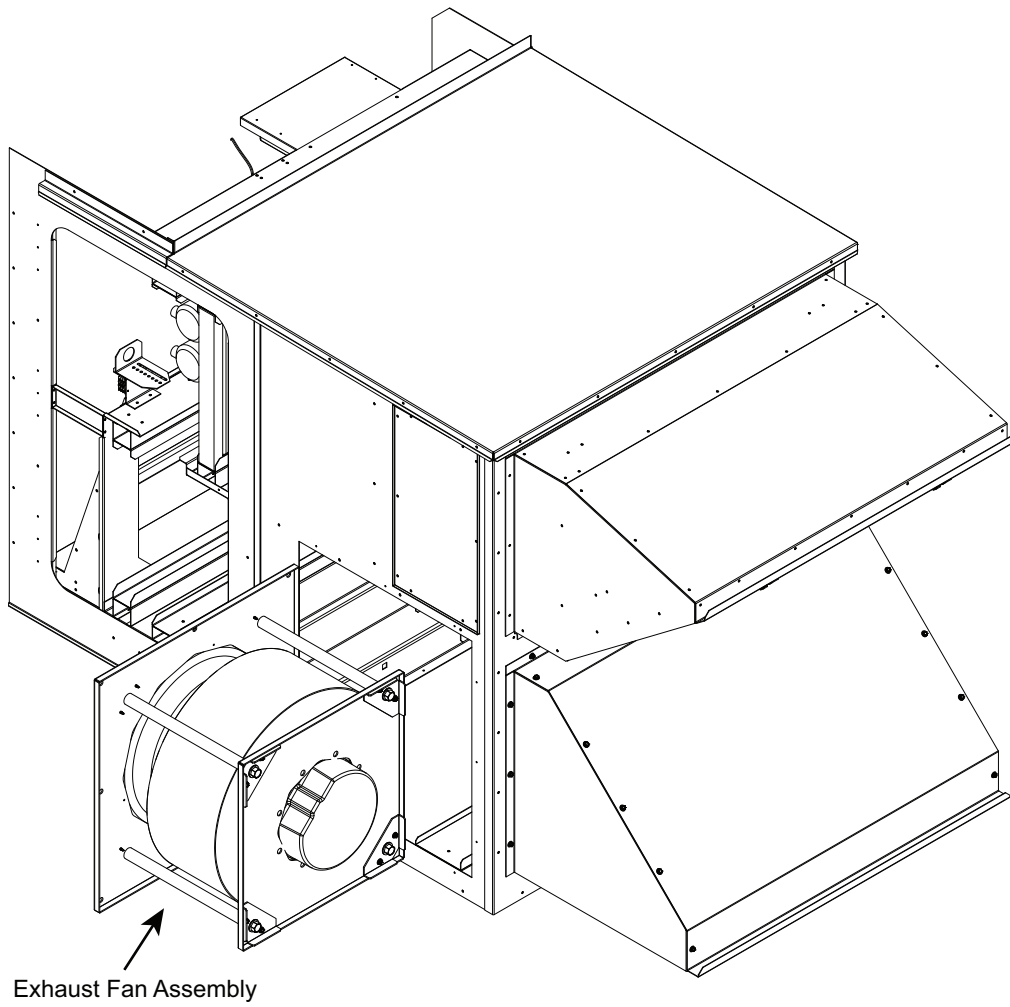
Exhaust Fan Assembly - Fastener Locations
